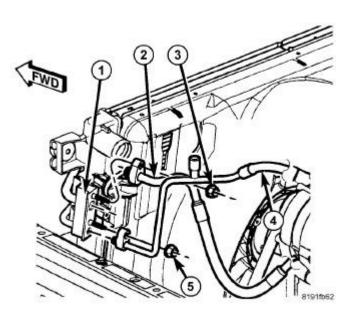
Removing/Installing Lower Radiator Hose Courtesy of CHRYSLER LLC
